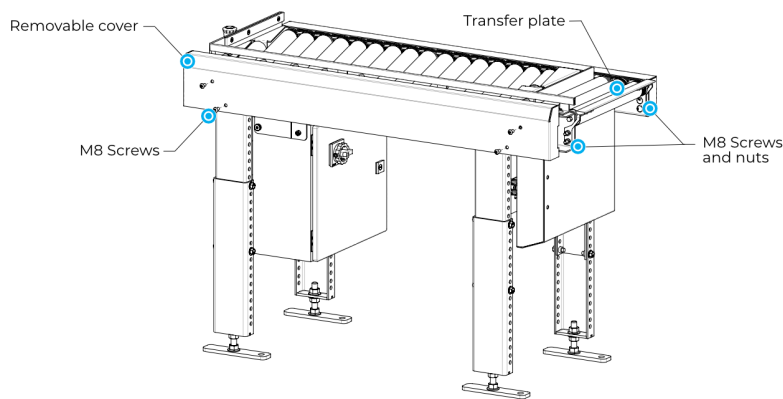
Robotiq Smart Infeed 100 - Side Covers and Transfer Plate
